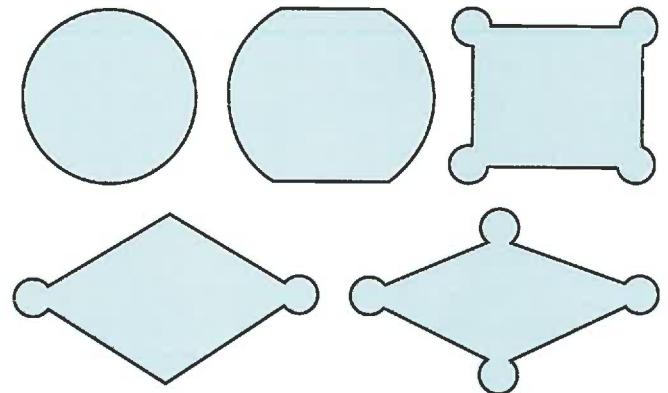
Saw manufacturers often use exclusive arbor shapes.
